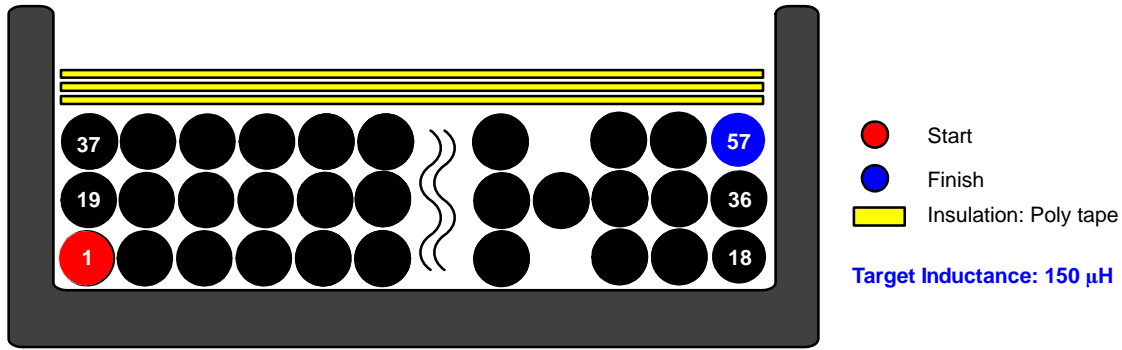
Buck Inductor (L_{BUCK}) Winding Structure
